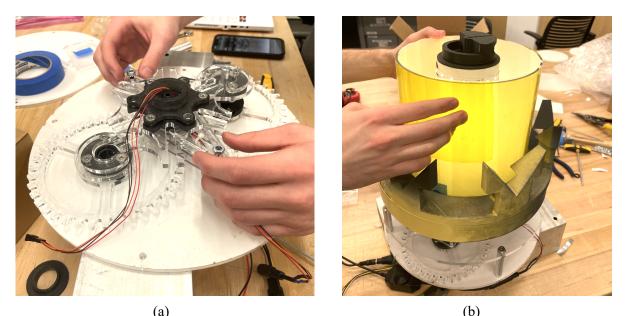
(a) In-progress assembly of gearbox mechanism. (b) In-progress assembly of Beacon & lampshade assembly.
